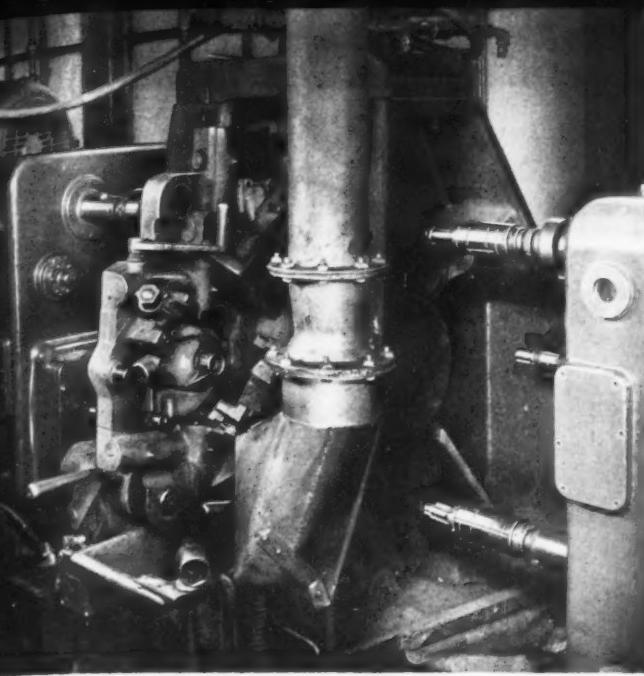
View from the Right-hand Side of the Double-head Machine Employed for Drilling, Boring, and Spot-facing the Water-pump Bodies
